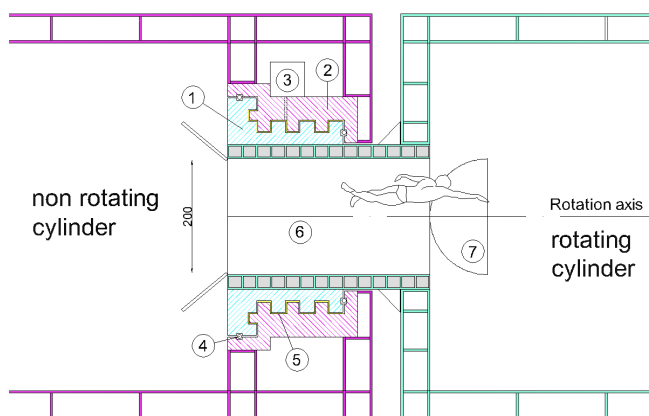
The Roto-Joint: (1) rotor, (2) stator, (3) auxiliary ferrofluid tank, (4) ball bearings, (5) seal gap with ferrofluid, (6) air lock, (7) fire door (© W. Grandl)
